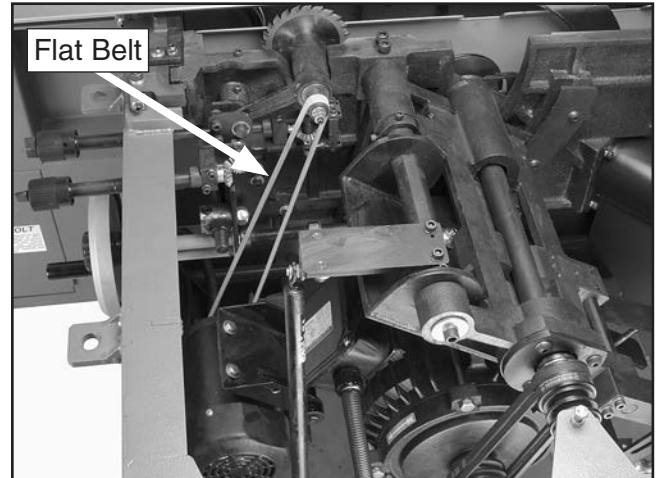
Flat belt installed on scoring motor and arbor pulley (table removed for clarity).
